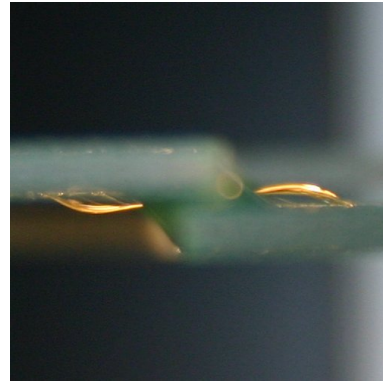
Side view of the wire bonding of the detector and read-out chip of the CCPD1.
